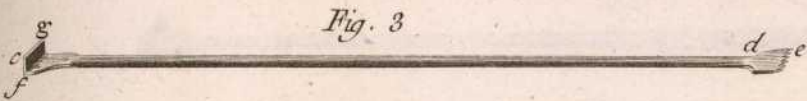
Tool with a long handle and two points labeled c, d, e, f, g.
